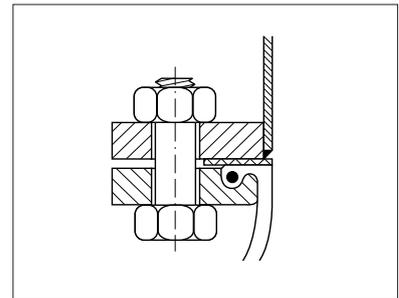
Flange provided with flat sealing gasket to protect the rubber surface.
